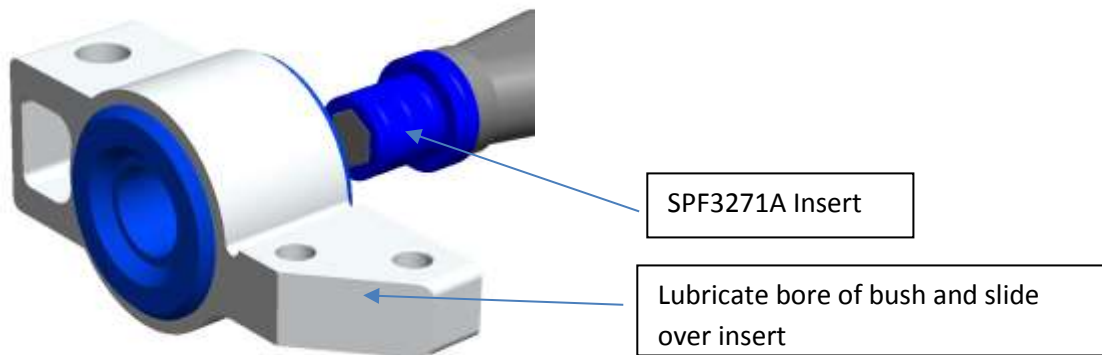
Push insert onto arm making sure it bottoms out on the peg of the arm (Left Hand Shown)
